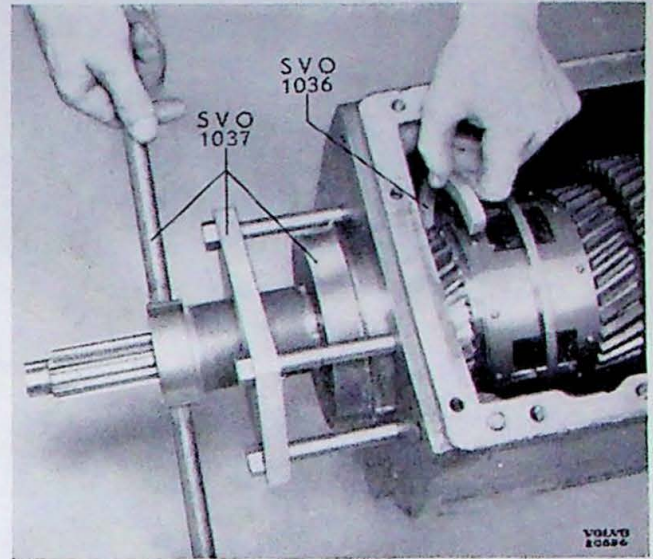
34. Fitting the bearing on the main drive pinion, K 12.
